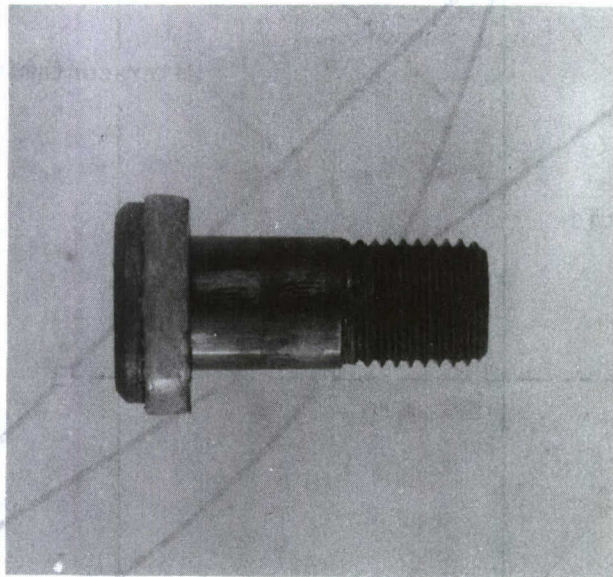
Taper-Lok Fastener Showing Evidence of Taper Mismatch Between Adjoining Plates. USA-Assembled Fastener Removed from Unused Specimen.
